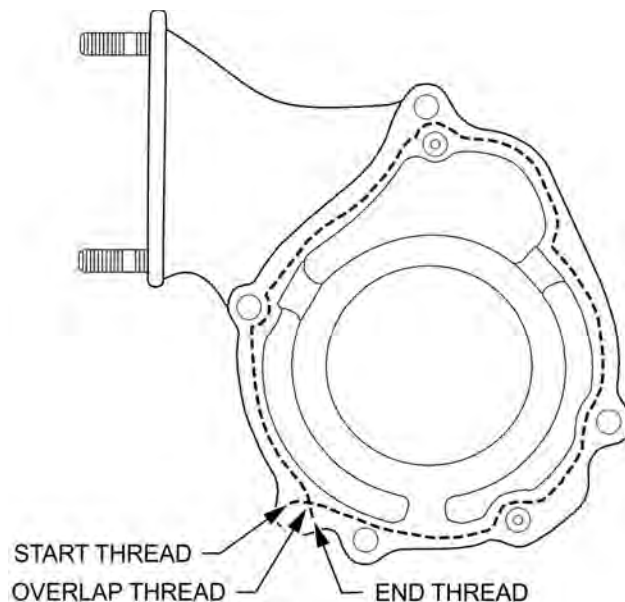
Threading Diagram, Starter Adapter Assemblies 641348, 646220, & 653074
